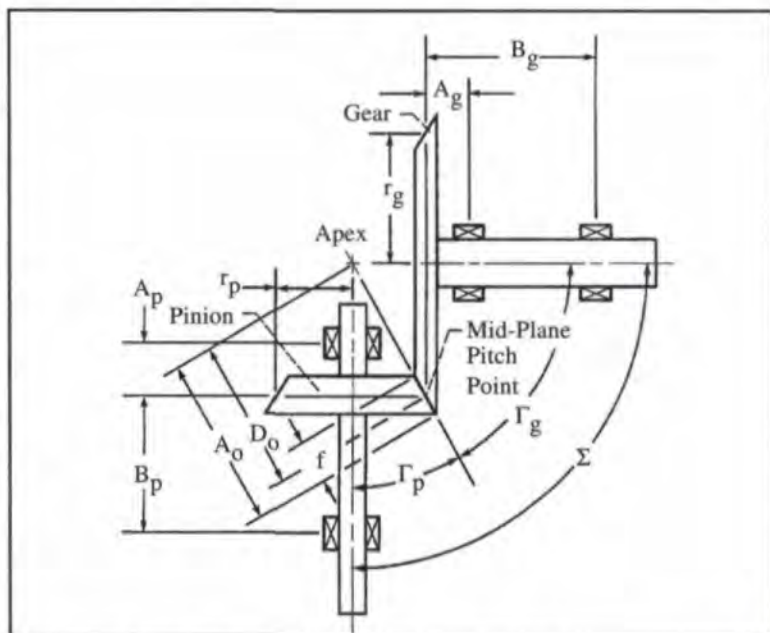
Spiral bevel gear mesh and support bearing geometry.
